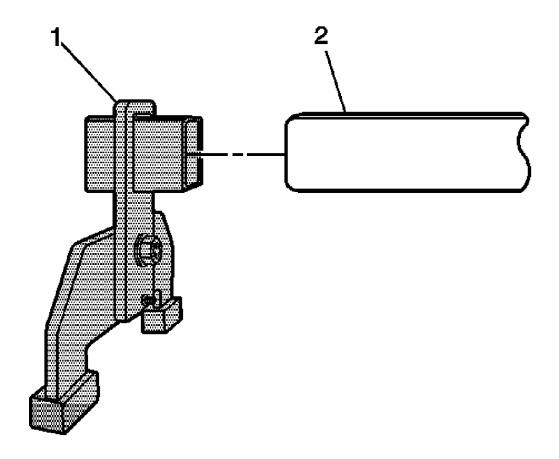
Identifying J 28467-B & J 28467-3 Courtesy of GENERAL MOTORS CORP.
